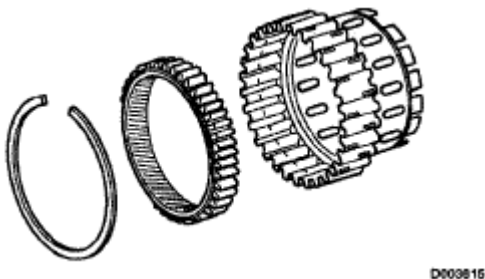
Installing Front Planetary Ring Gear And Snap Ring To Brake Hub
